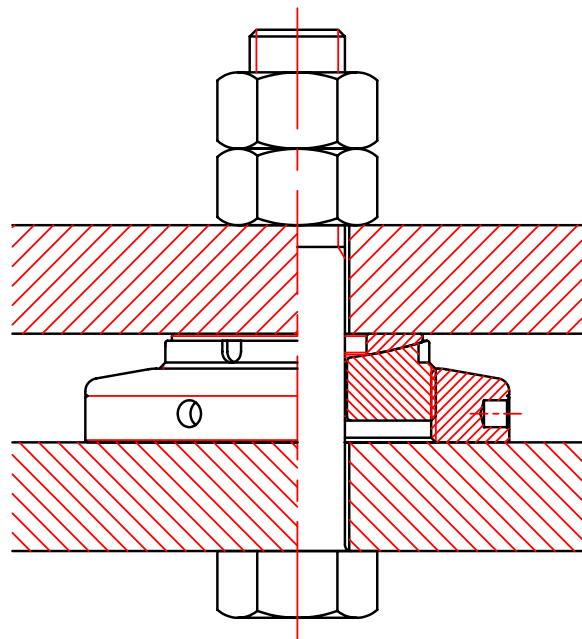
General arrangement of Vibracon[®] Low Profile
